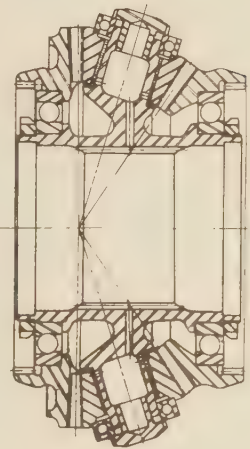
PLANETARY BEVEL GEARS, TWO-SPEED
